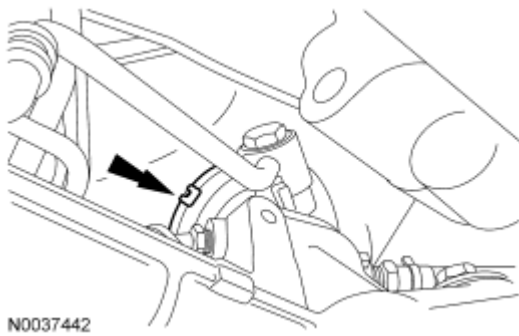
Locating Steering Gear-To-Dash Seal Clips
